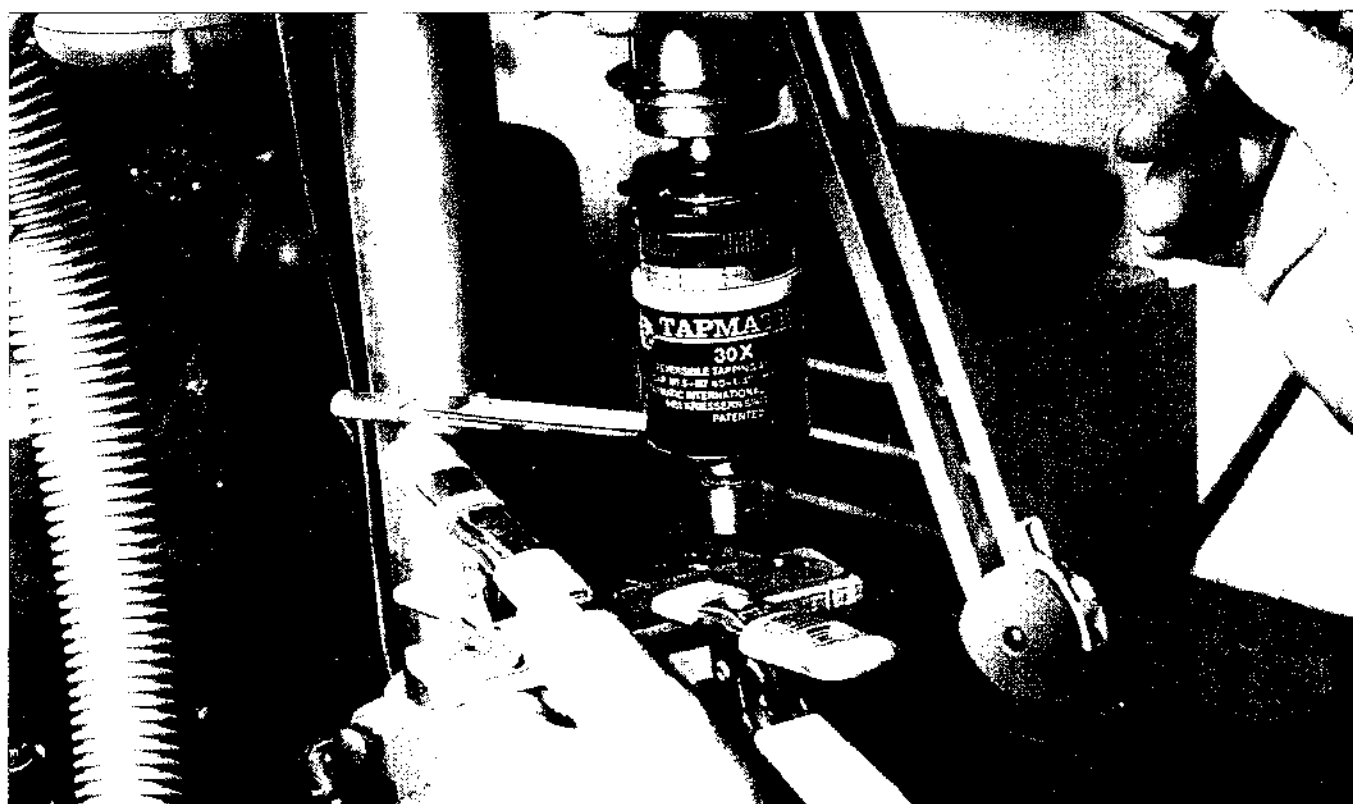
For G-10 or carbon fiber laminate handles use the pattern as described above to cut out only the spring plate and tap the screw holes. The spring will now become the pattern.
